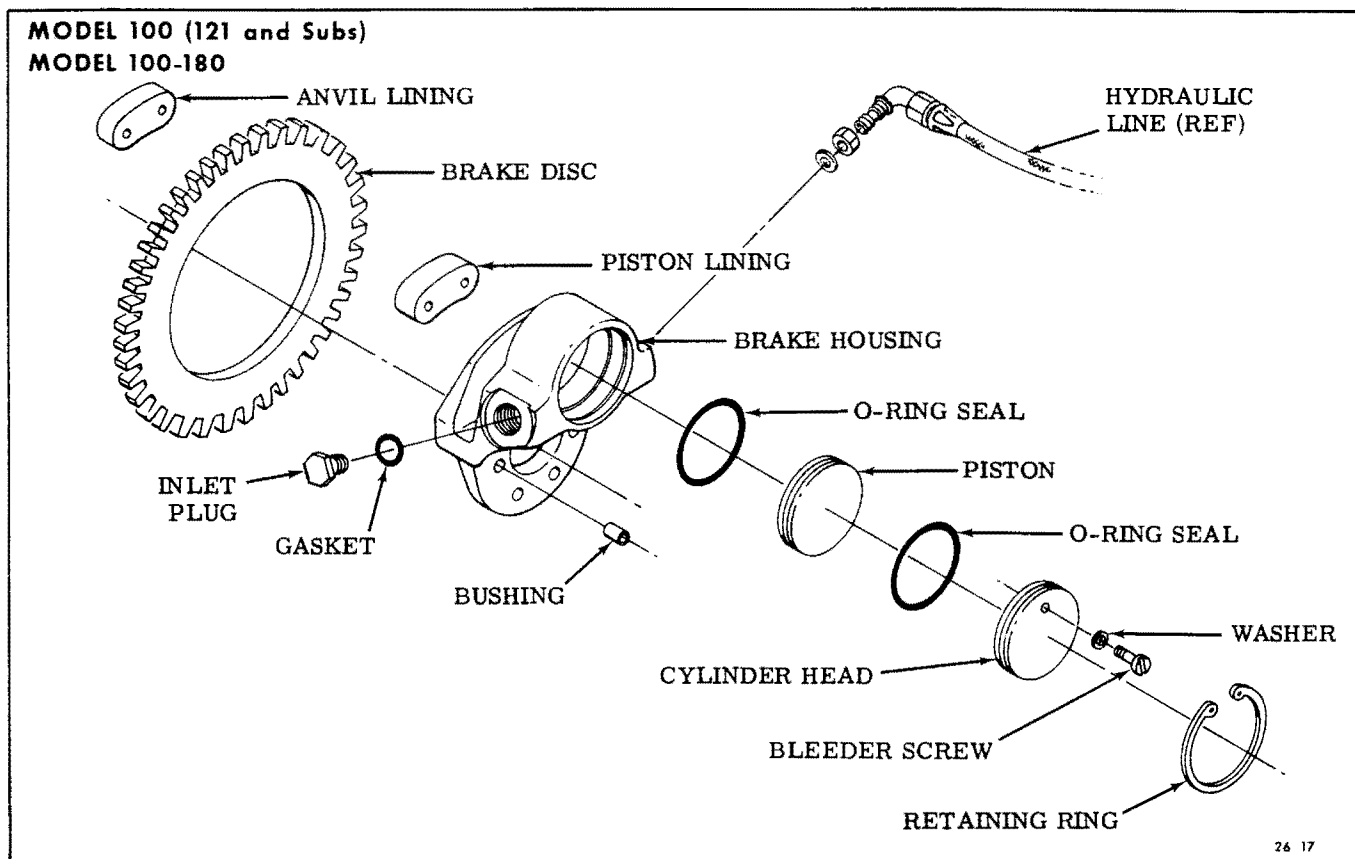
Brake Assembly (Aircraft 121 and Subs)
